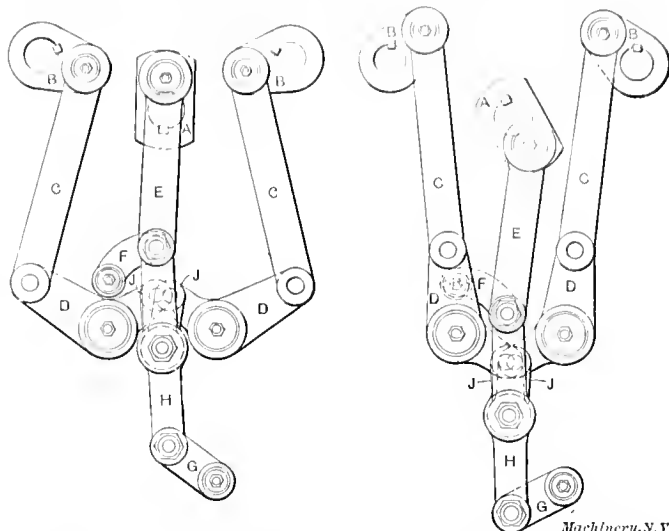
The Outside Toggle Mechanism in the Position to raise the Blank Holder. Fig. 3. The Toggle Mechanism while the Blank Holder is Lowered.
